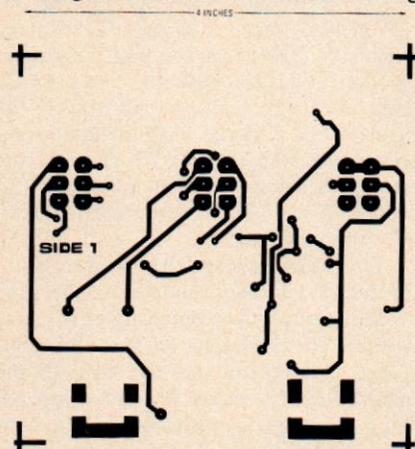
FOIL PATTERN for the components side of the PC board. Approximately half size.
